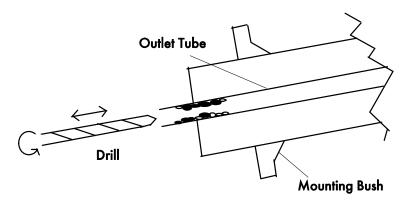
i Diagram to Show Method of Cleaning a Blocked Outlet Tube
